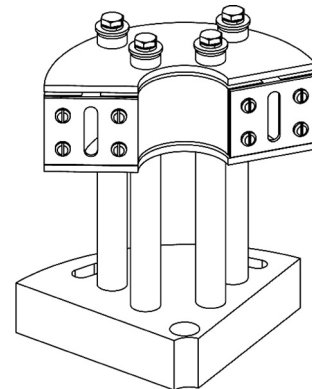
Isometric drawing of the electric sector of MULTUM-S.
